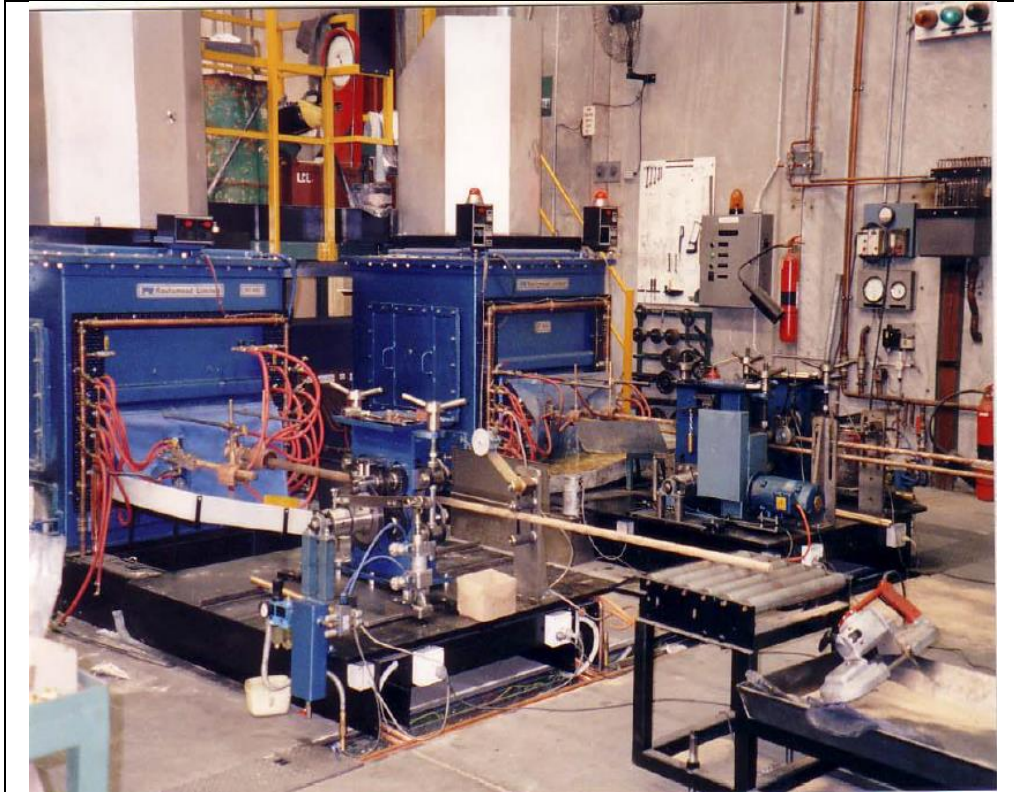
Horizontal Continuous Casting (<http://www.lcl.com.au>)
